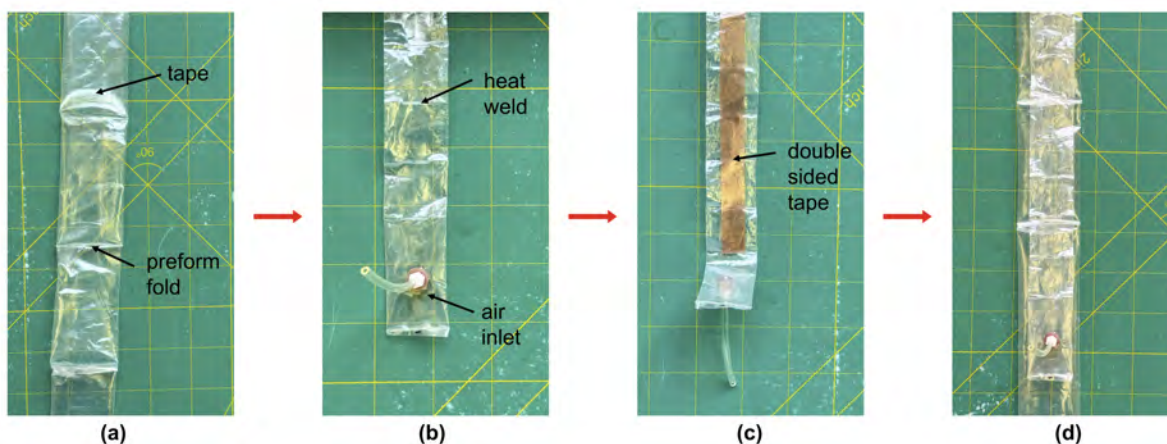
Fabrication process of the vine robot and pouch motor assembly. (a) Tape is used to maintain the folded material. Each structural pre-fold pinches 0.95 cm of the primary backbone material, with the folds spaced 5.08 cm apart to define the axial segment. (b) Direct thermal welding is utilized to bond the pouch motor layers together. (c) Highly adhesive double-sided tape is used to mount the pouch motor to the vine robot.
